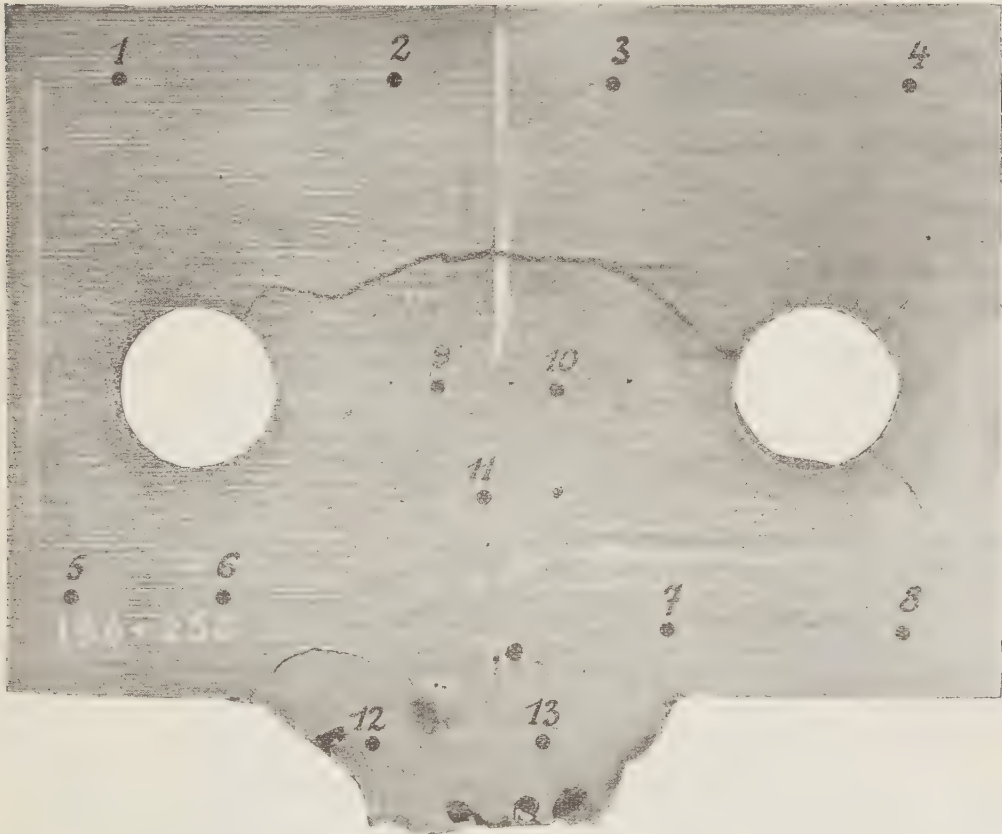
Thermite-pressure weld with plate.
